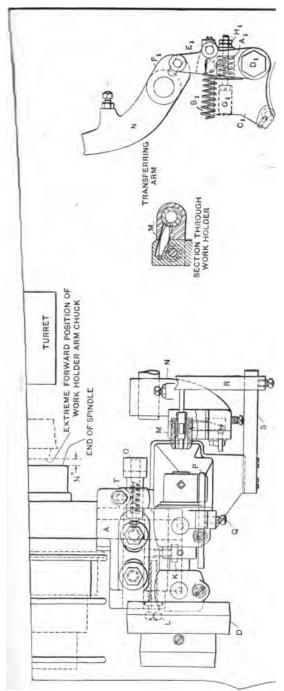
Rear View of the Burring Attachment placed on a No. 00 Brown & Sharpe Automatic Screw Machine
